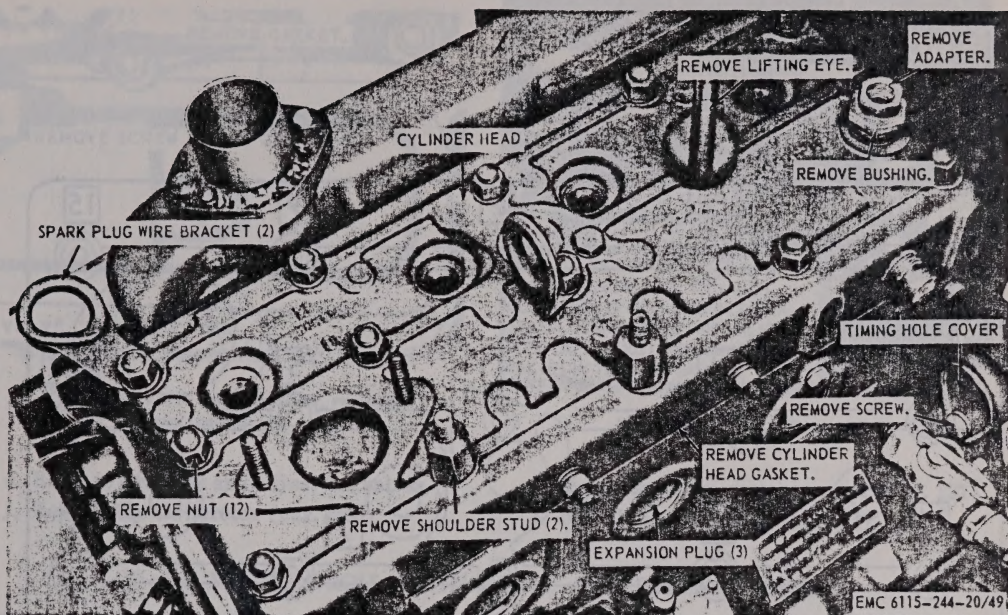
Cylinder head, timing hole cover, and expansion plugs, removal and installation.
